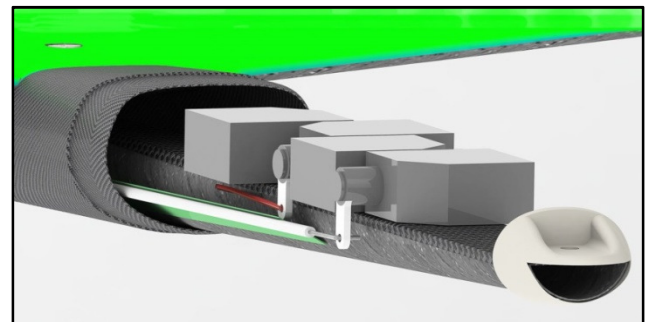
Closing up of aileron pushrod tip on servo side
